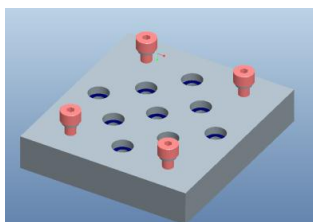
Fixture Design for Motor Mounting Lugs Testing
